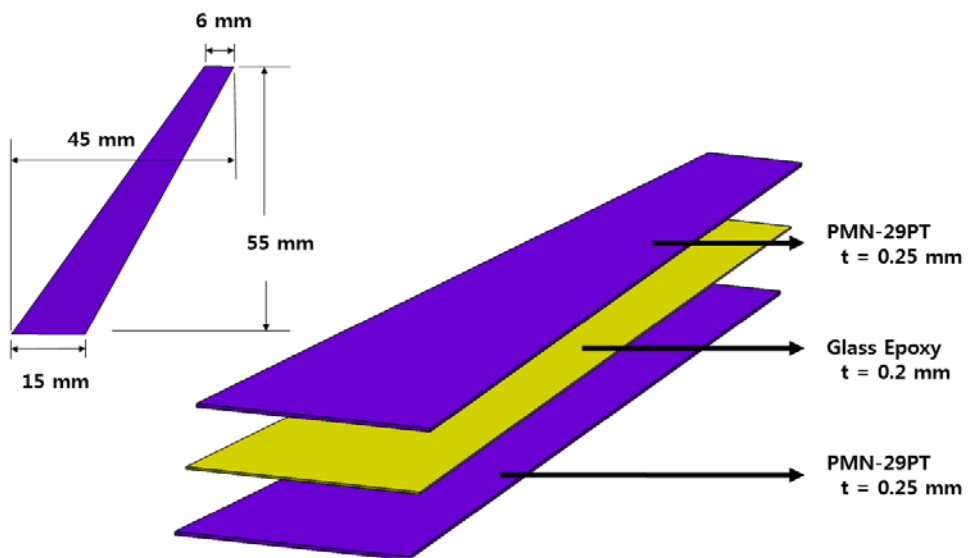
Lay-up and dimensions of the bimorph actuator in Design Candidate 2
